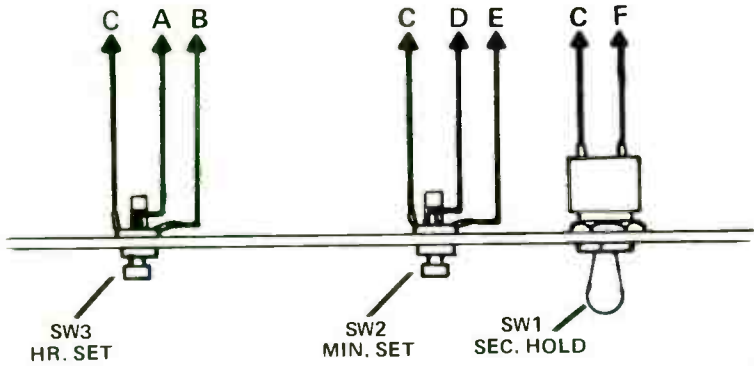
CLOCK COMPONENT LAYOUT (SWITCHES)
